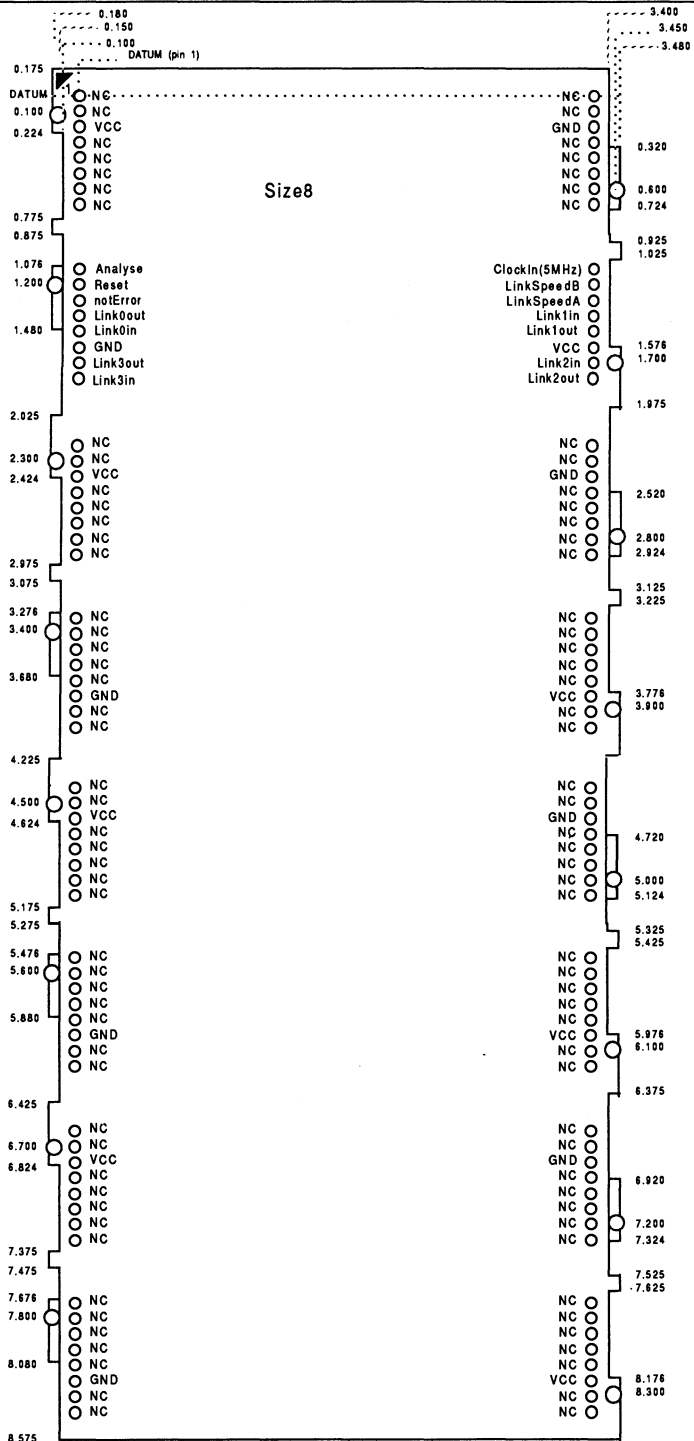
IMS B409 outline drawing (All dimensions in inches)
